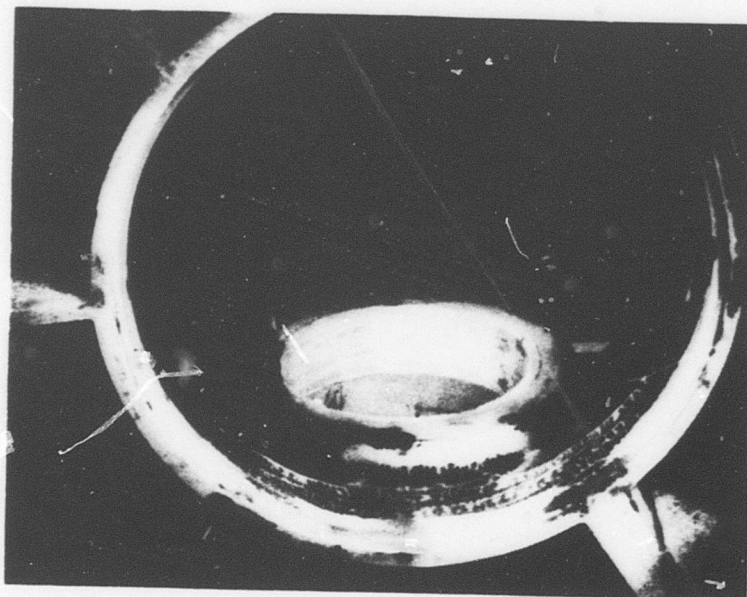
Cracks in the Input Gear Roller Bearing Bore of S/N 1 Housing.
